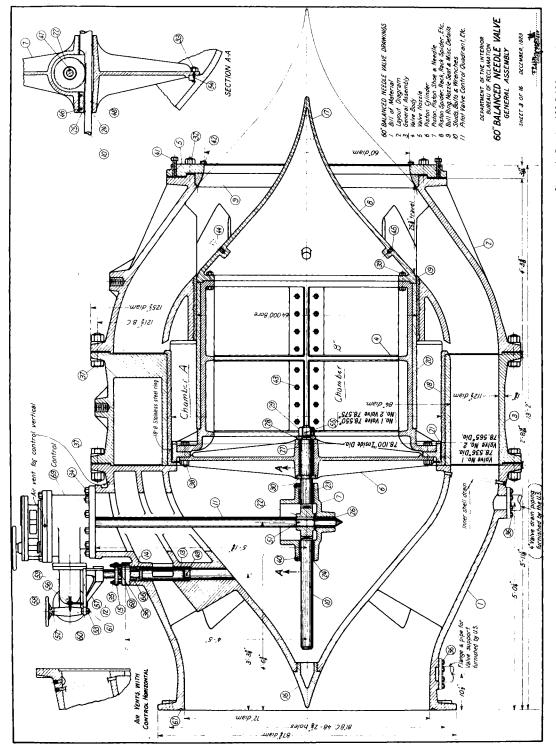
Drawing 100-E-105, general assembly of 60-inch balanced needle valve.
